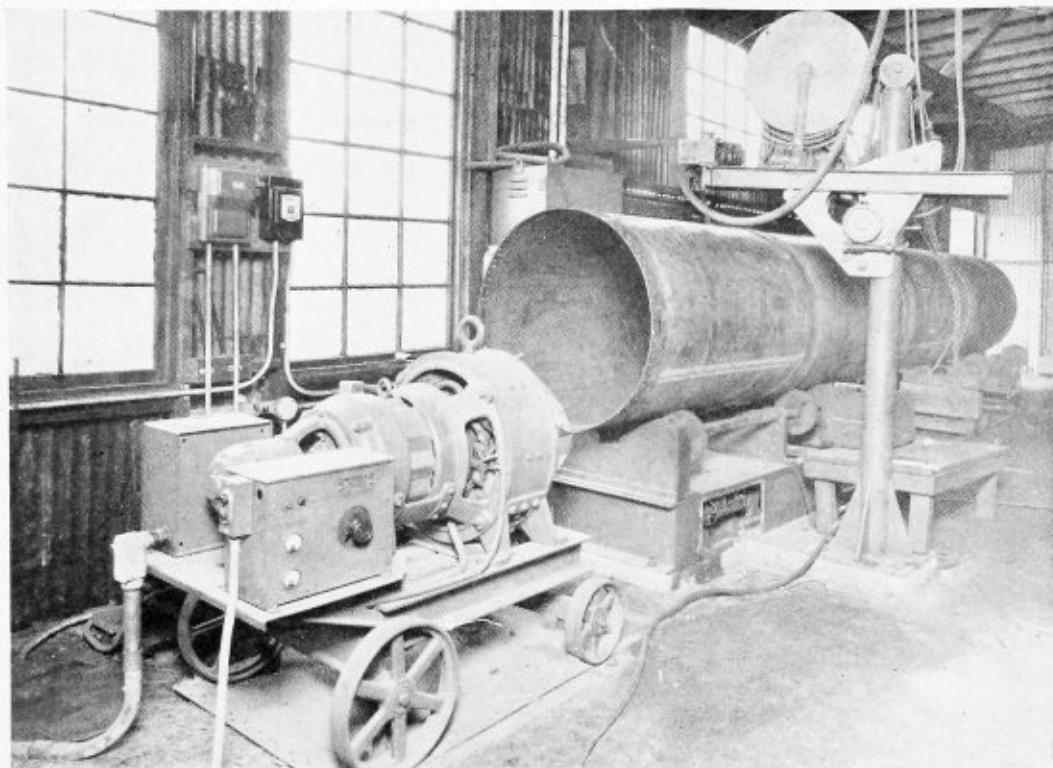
(Left) Circumferential seam lap welding equipment. Fig. 4.—(Below) Automatic arc welder in use on cylinder made of $\frac{3}{4}$ -inch steel plate
